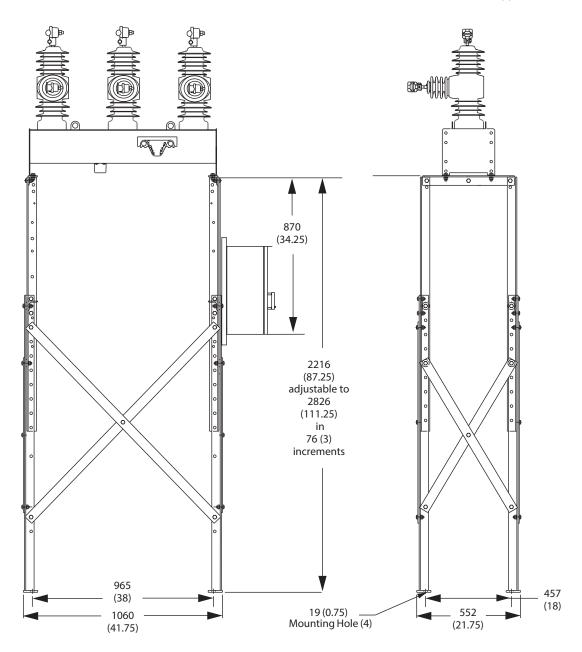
Dimensions of DAS switch with substation-mounting frame accessory.
